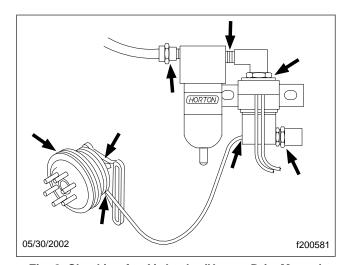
, Checking for Air Leaks (Horton DriveMaster)
